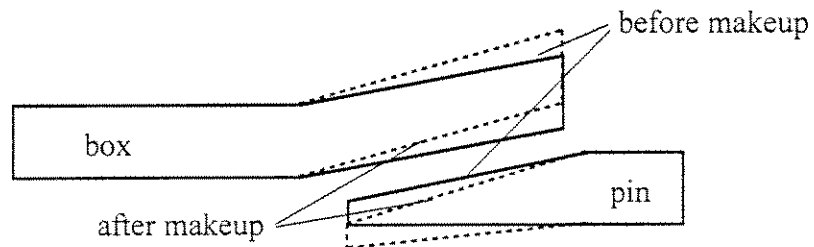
Threaded Joint Deformation Caused by Make-up
